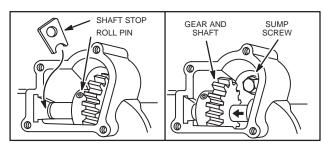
REMOVE AND INSTALL SUMP SCREW
